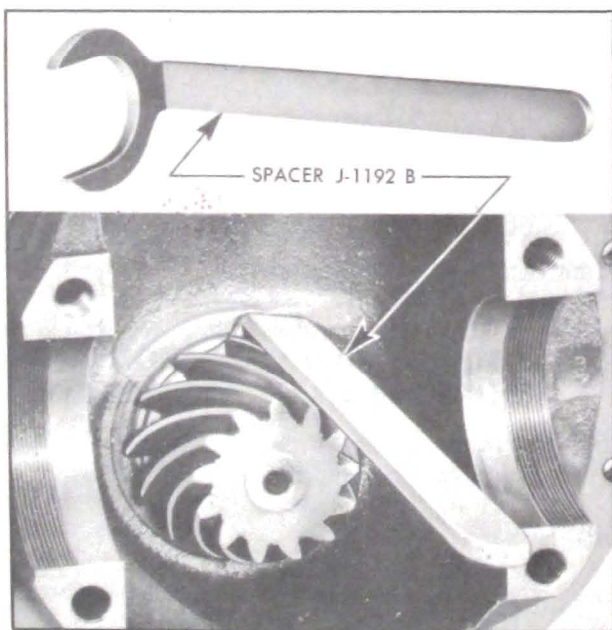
Use of Pinion Bearing Spacer J 1192-B
